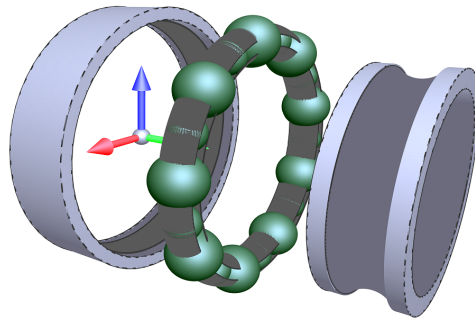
Exploded view of digital twin of radial ball bearing of 6208 series
